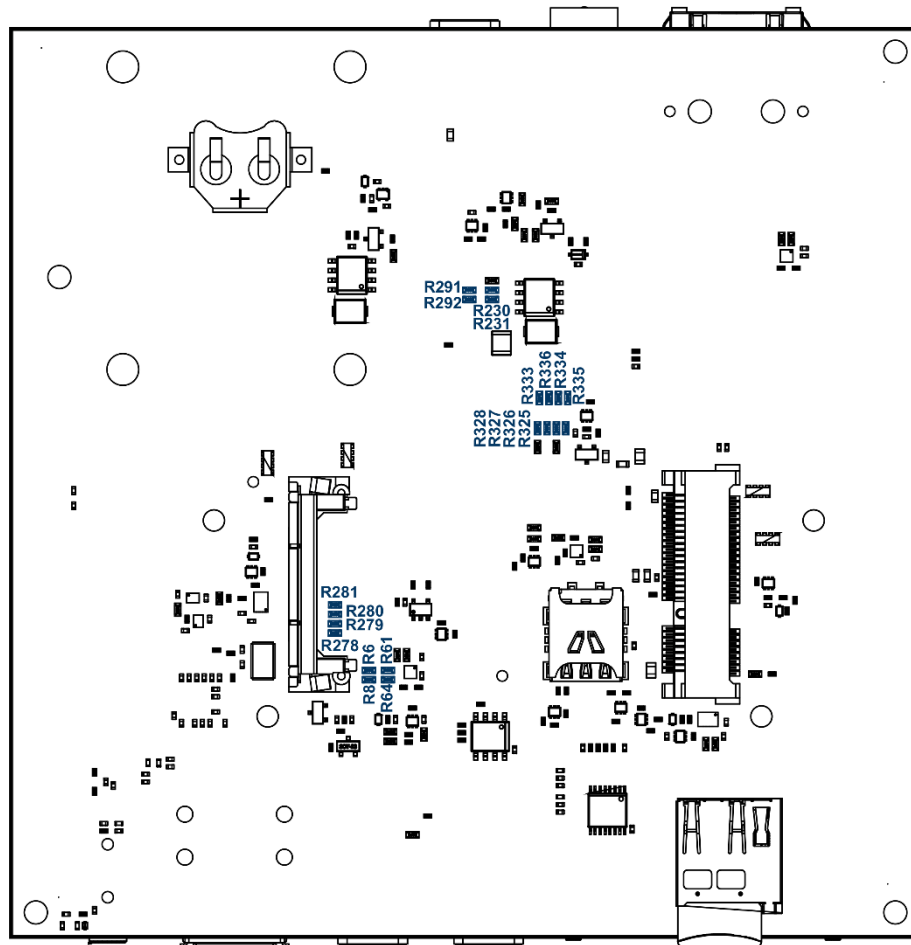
Dahlia Carrier Board Assembly Options – Bottom Side
